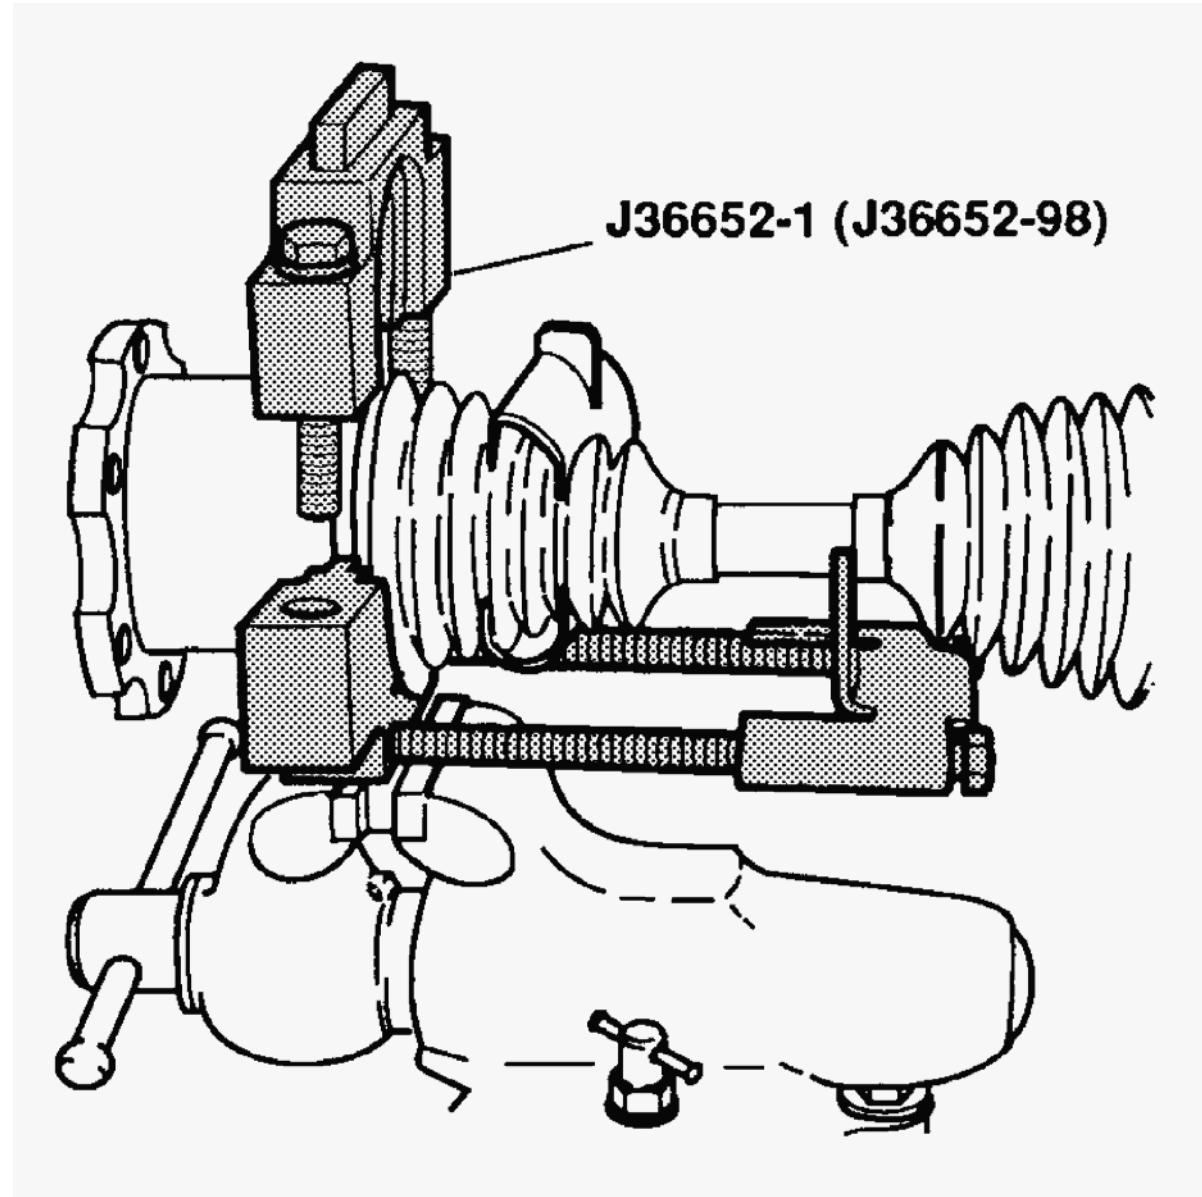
Assembling Bolts And Support Plate To Base Of J 36652-98
